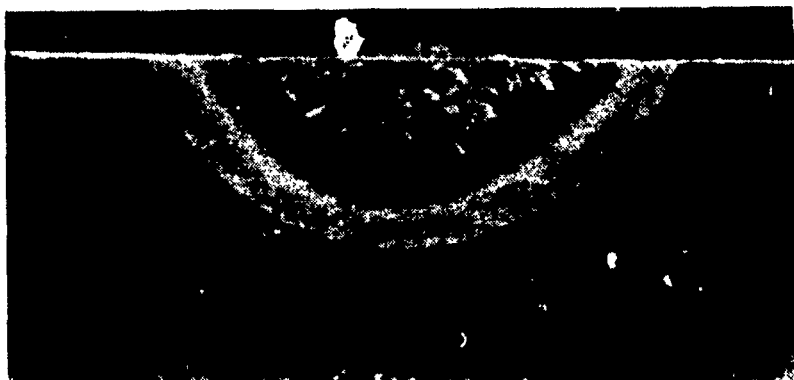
Weld Pool Cross Section 251v, 13.2A, 4mm Arc, 45° Electrode Tip Angle. Scale 15.75 Marks Per Centimeter. Enlargement x5.7.
